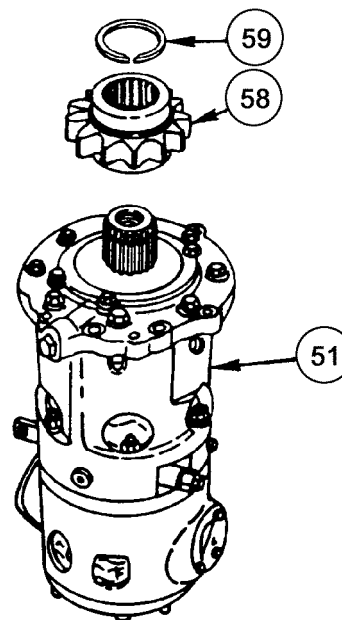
13 Tooth Hydrostatic Drive Gear.
